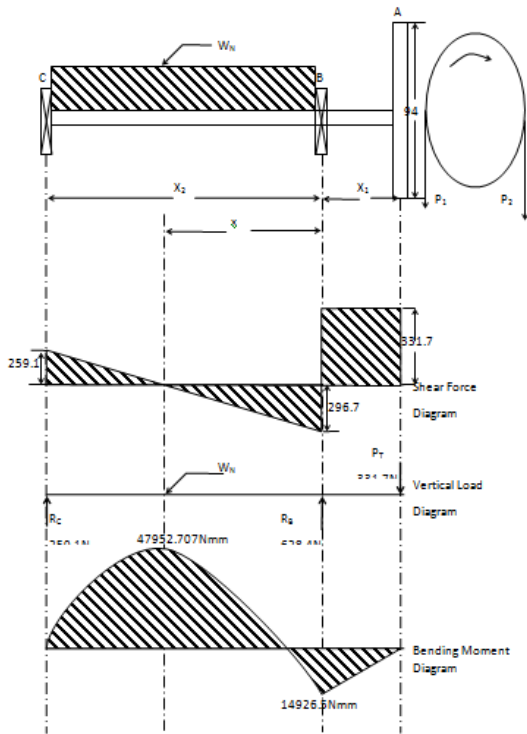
Sketch of load, stress and bending moment on conveyor/mixing shaft
